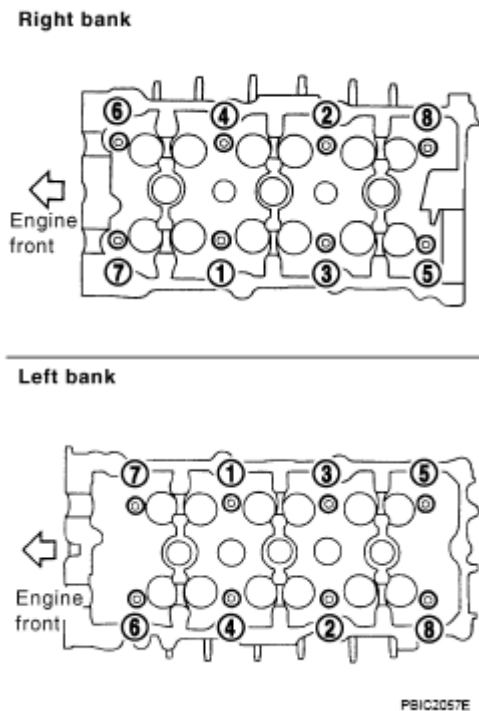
Identifying Cylinder Head Bolts Loosening And Tightening Sequence
